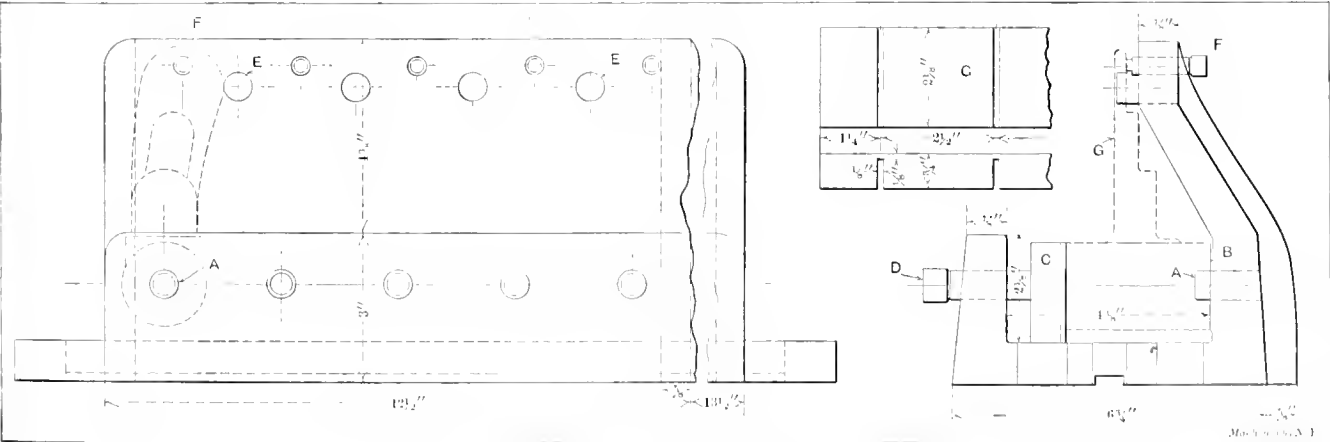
Gang Fixture in which Surfaces *G* of Hangers are milled
